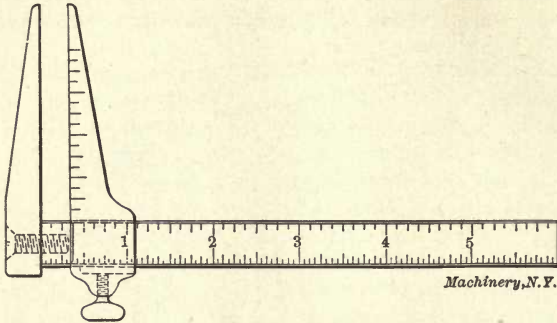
Tool used for Lapping when Sizing Duplicate Parts
